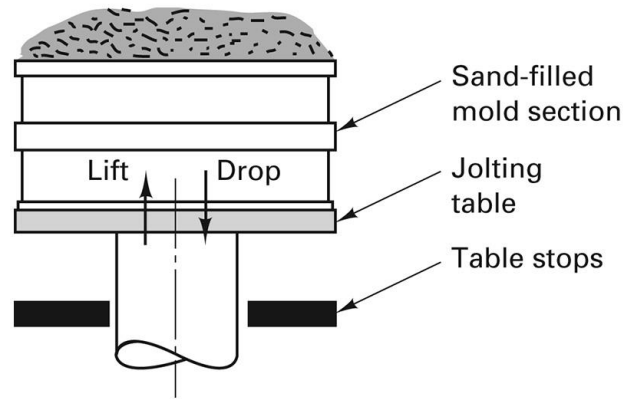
(Above) Jolting a mold section. (Note: The pattern is on the bottom, where the greatest packing is expected.)
